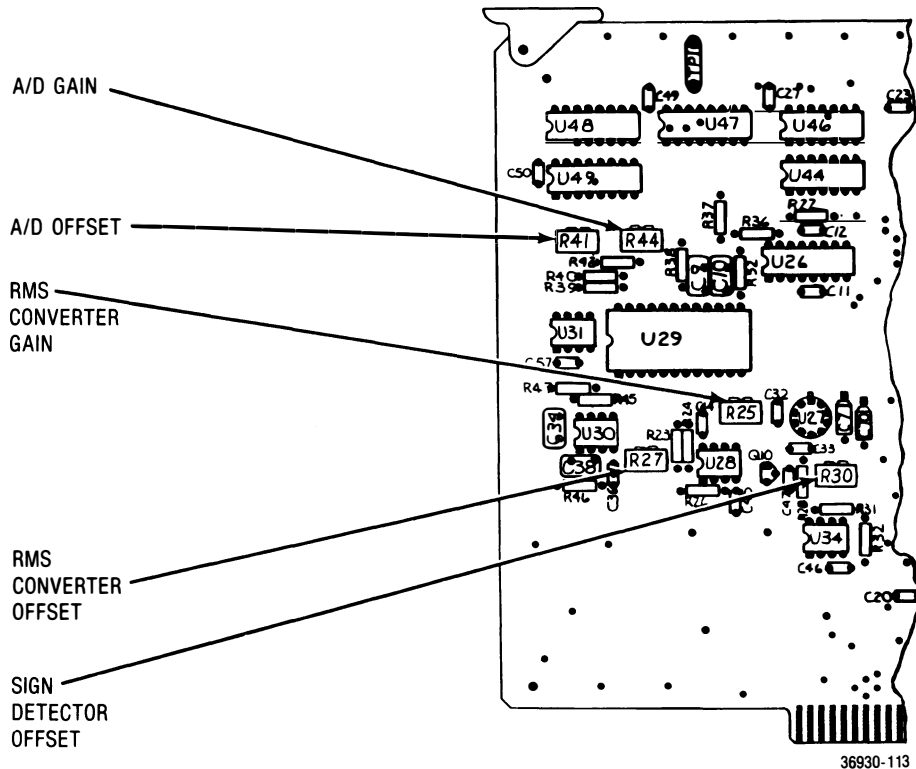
Processor Interface Board (A11) - Alignment Points
